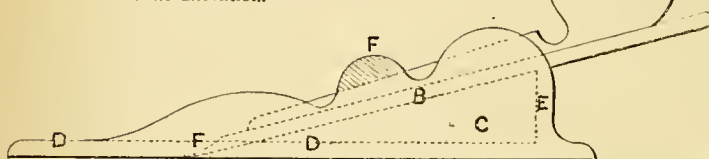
SMALLER END SURFACE PLANE.—Side Elevation.
